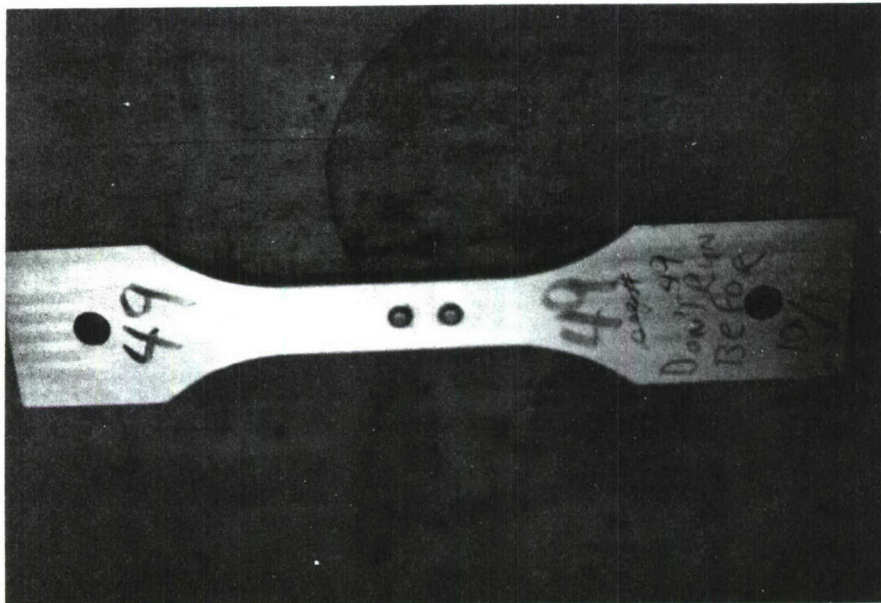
Zero Load Transfer Specimen with Protruding Head Fasteners
